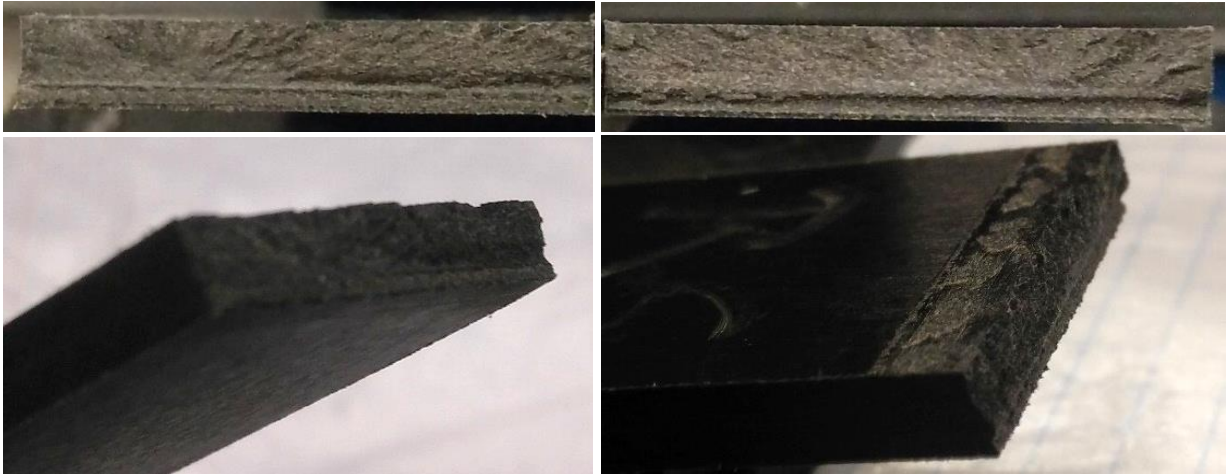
Fracture of highest load specimen, S23, from the advancing side (left) and the retreating side (right).
